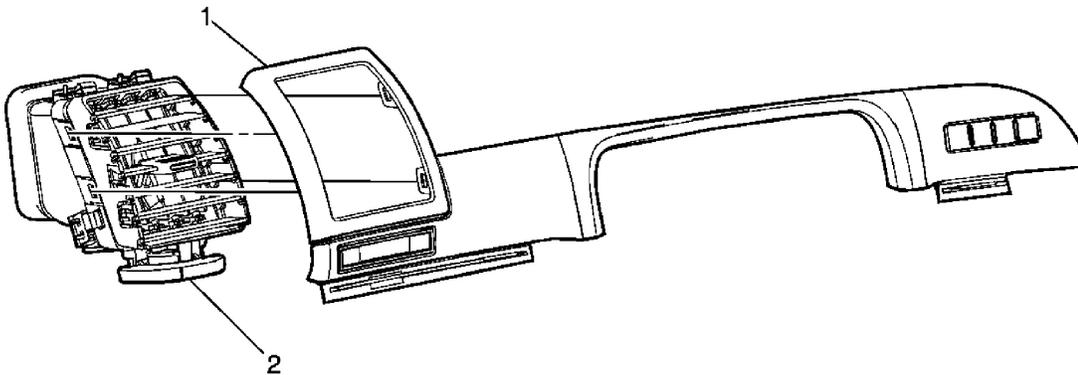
View Of Left Side Instrument Panel Outer Air Outlet
